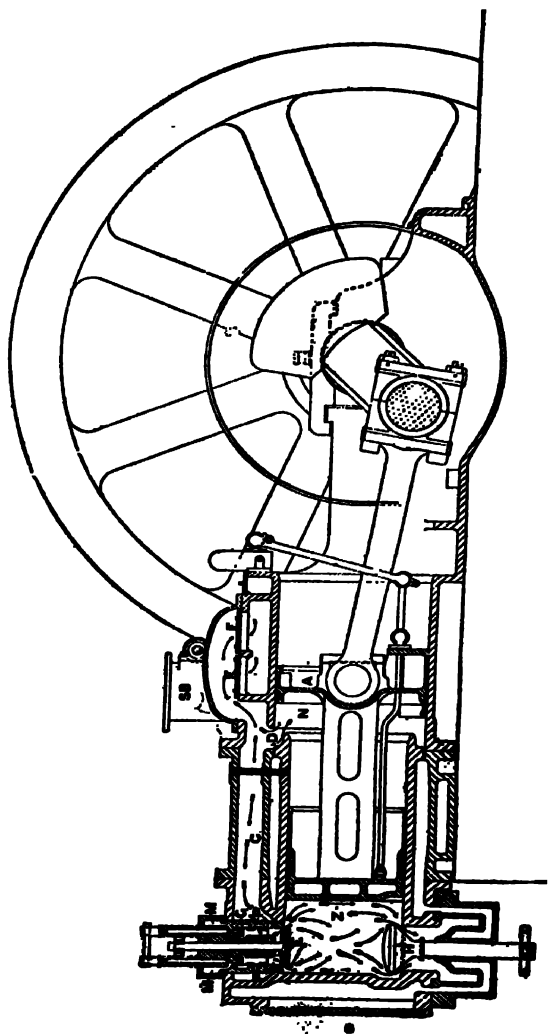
Section of Premier Positive scavenger type gas-engine.
